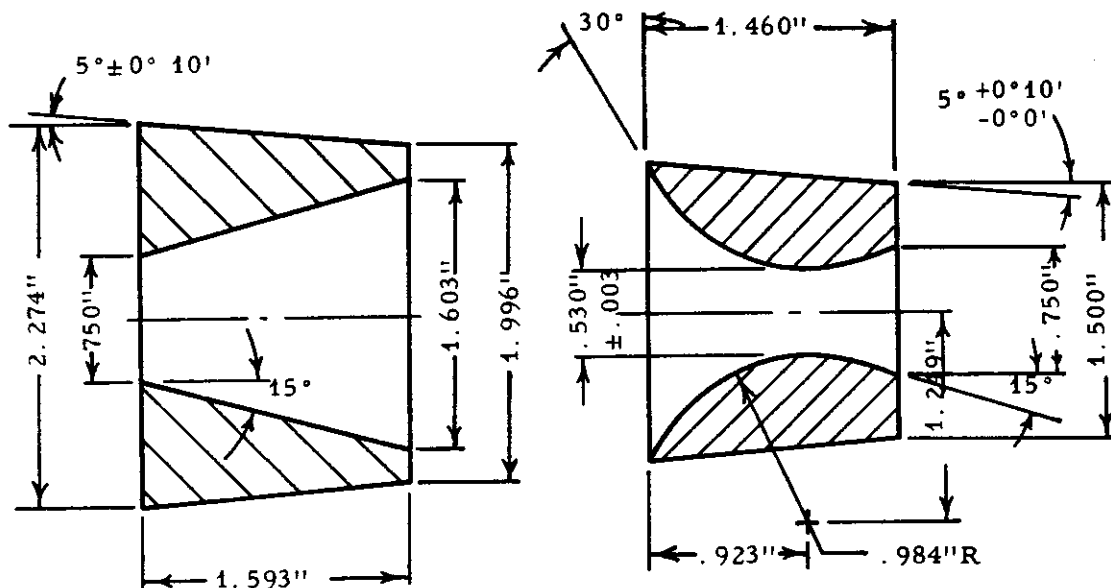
Graphite Nozzle Insert and Expansion Cone for National Carbon Company Test Motor
